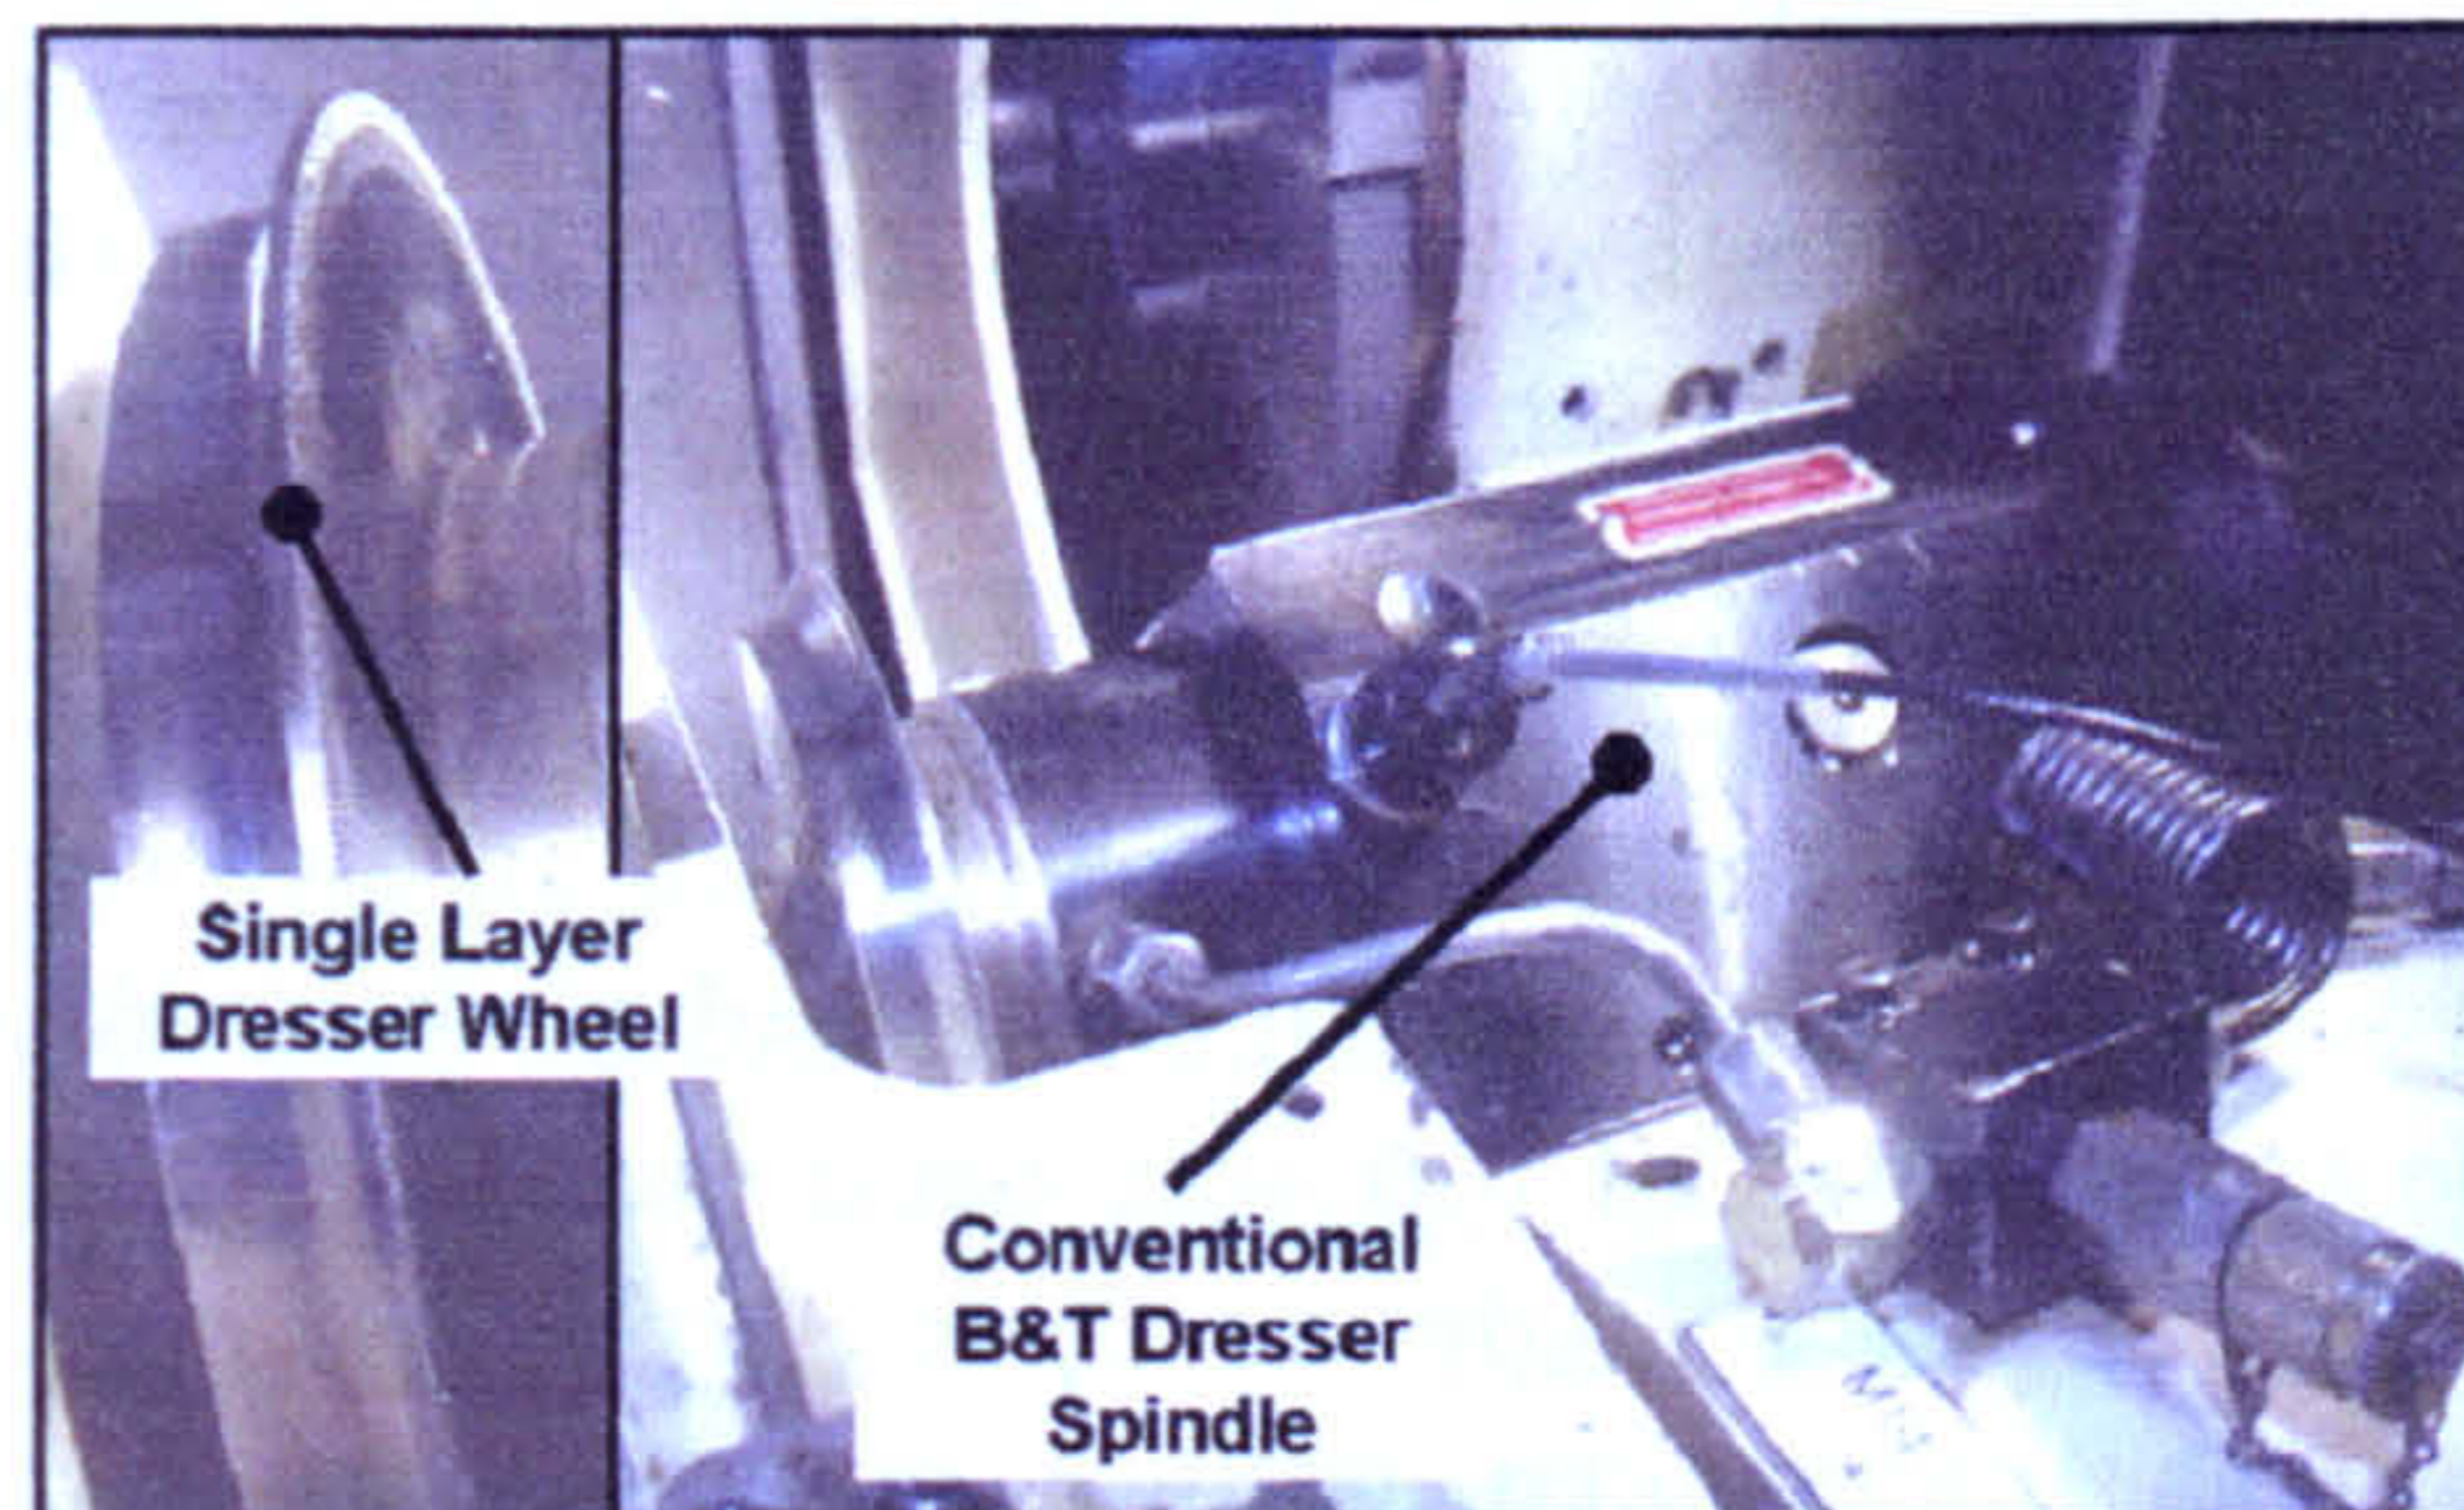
Conventional *LT1* Dresser Wheel & Spindle
